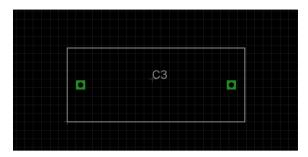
Footprint for the capacitor  $C_3$  in board layout.
